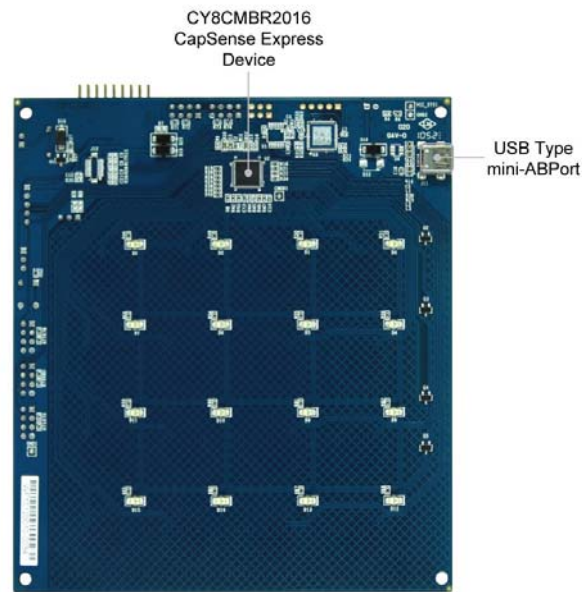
The CapSense Matrix Button Keypad PCB and Component Diagram (bottom view)
